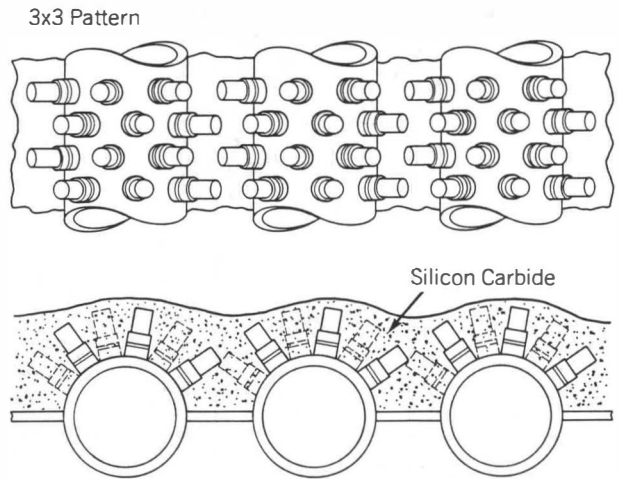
WESTCHESTER REFUSE BOILER LOWER FURNACE STUD PATTERN
